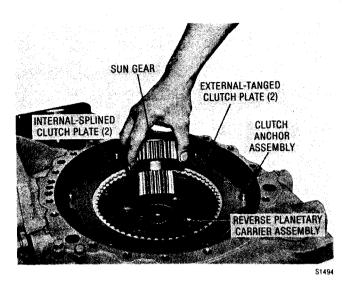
Installing forward-and-reverse sun gear (TRT 2211-3, 2411-3)
